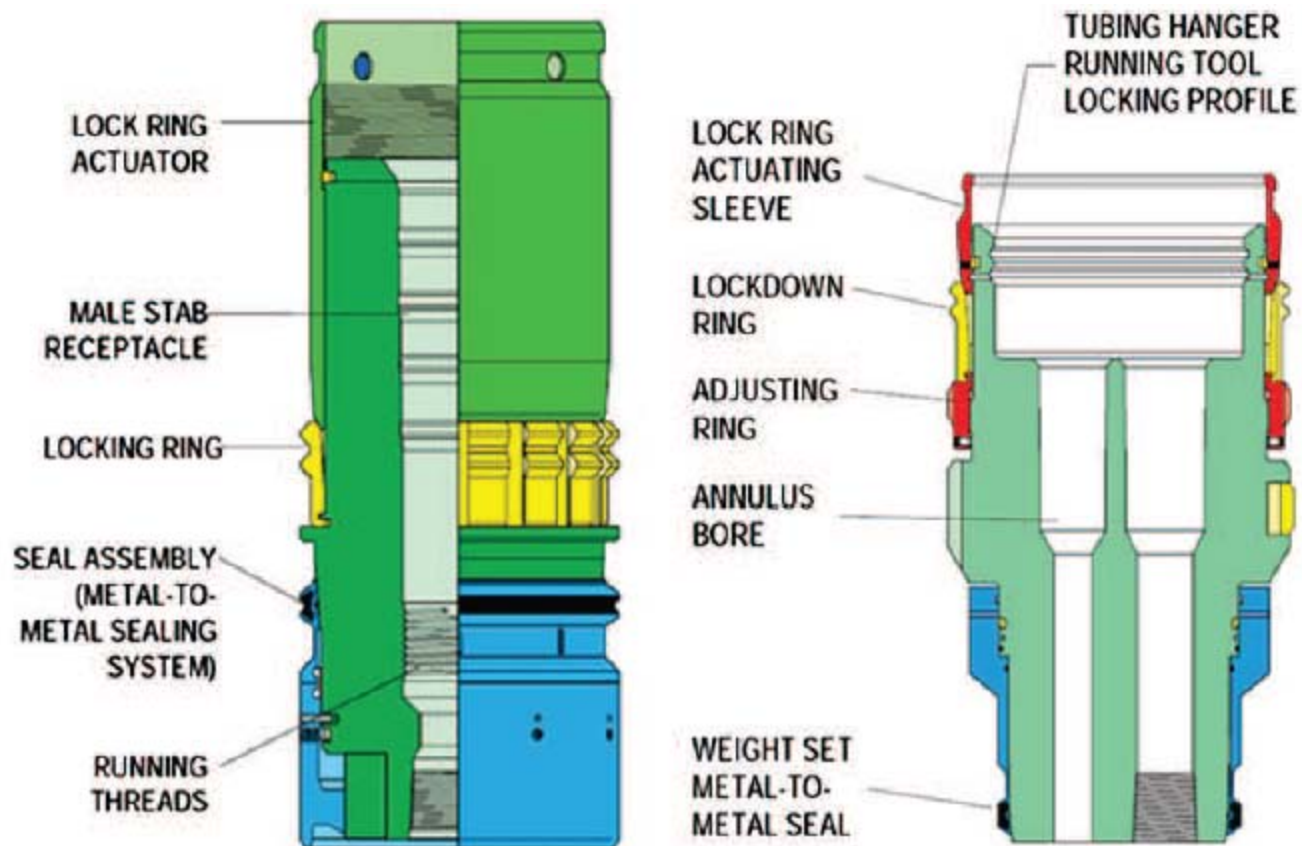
Concentric and Multibore Tubing Hangers (Courtesy of Dril-Quip)
